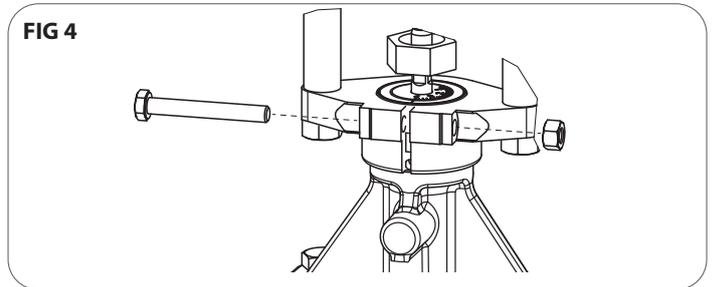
Mount the actuator on the valve neck and insert the bolt. Tighten the nut so the actuator is securely locked on the valve.
